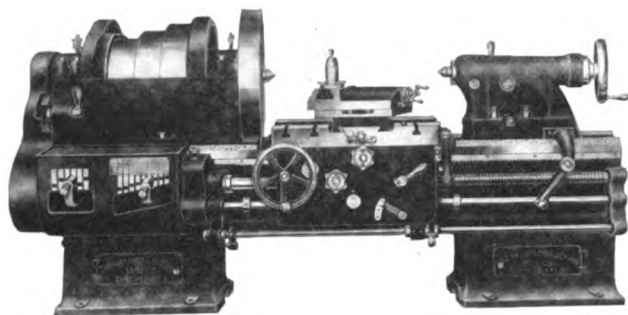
20-Inch Heavy, Quick-Change-Gear, Type Lathe
